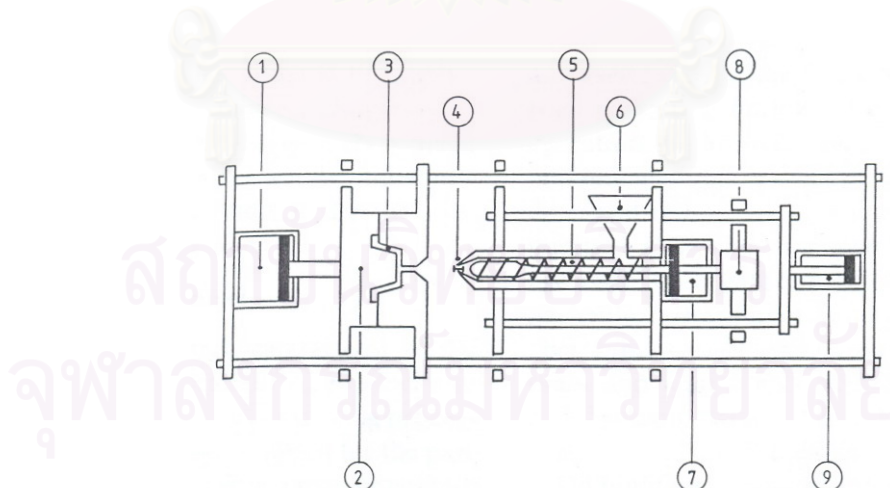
Schematic Diagram of an Injection Molding Machine.
